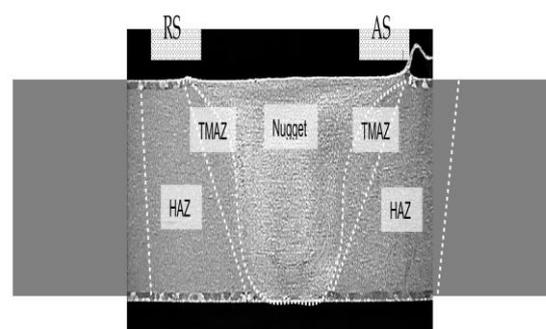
Zones of Friction Stir Welding (S.Kahl, 2010)
